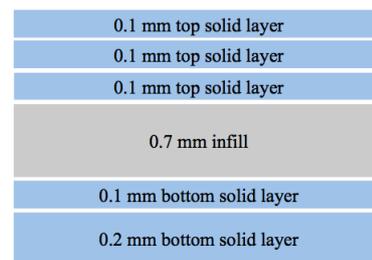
Top/bottom solid layers and infill cross-sectional view.
